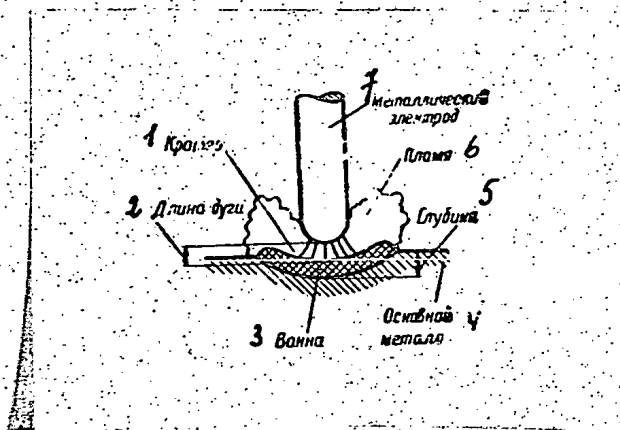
Diagram of a stable welding arc between the electrode and base metal.
